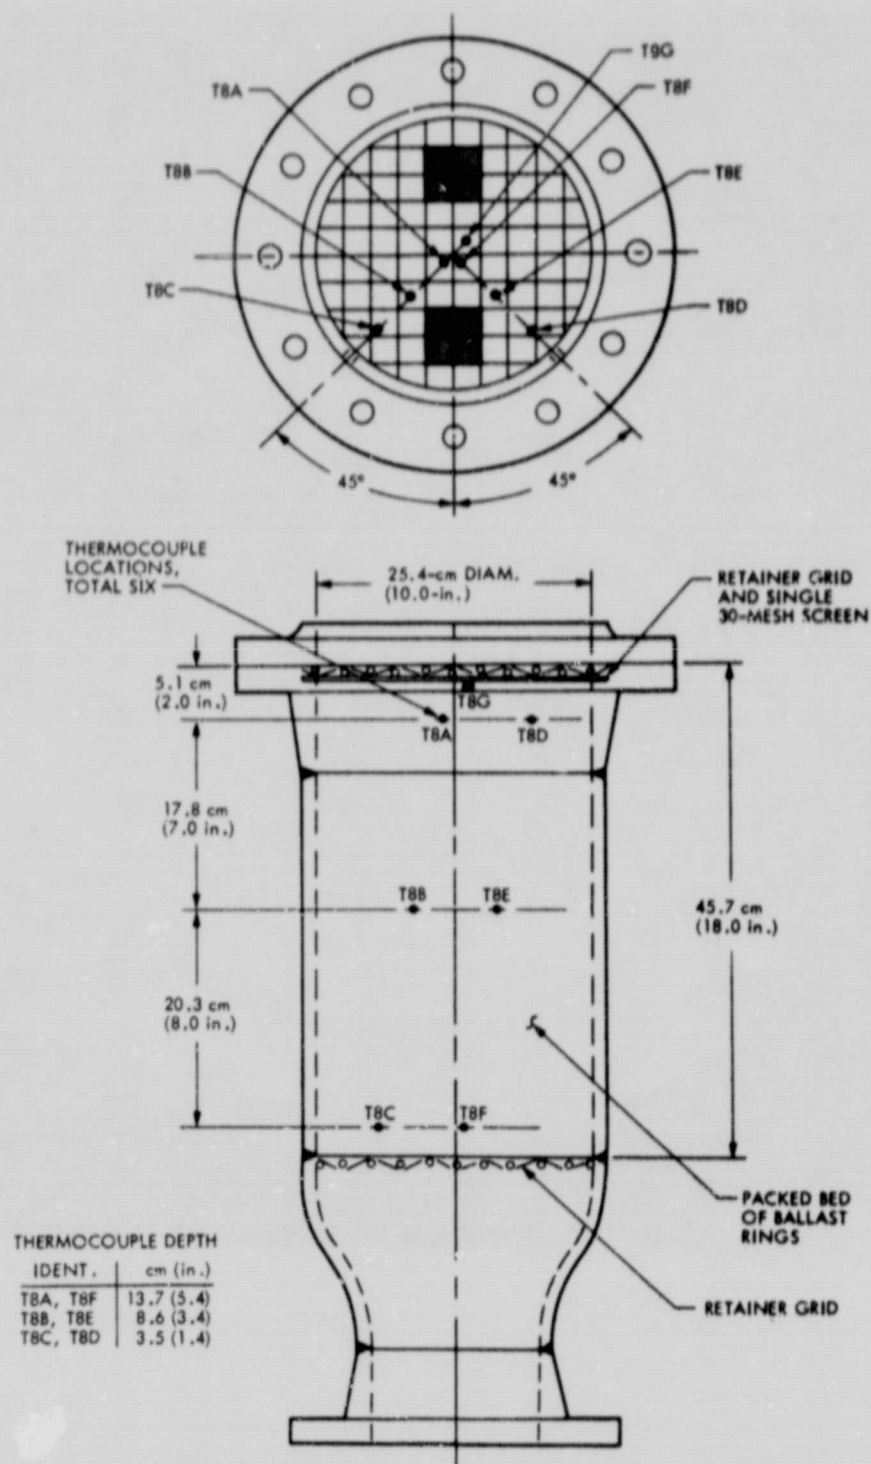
Packed Bed of Aluminum Ballast Rings with Single 30-Mesh Screen Arrester Test Assembly Schematic Drawing
